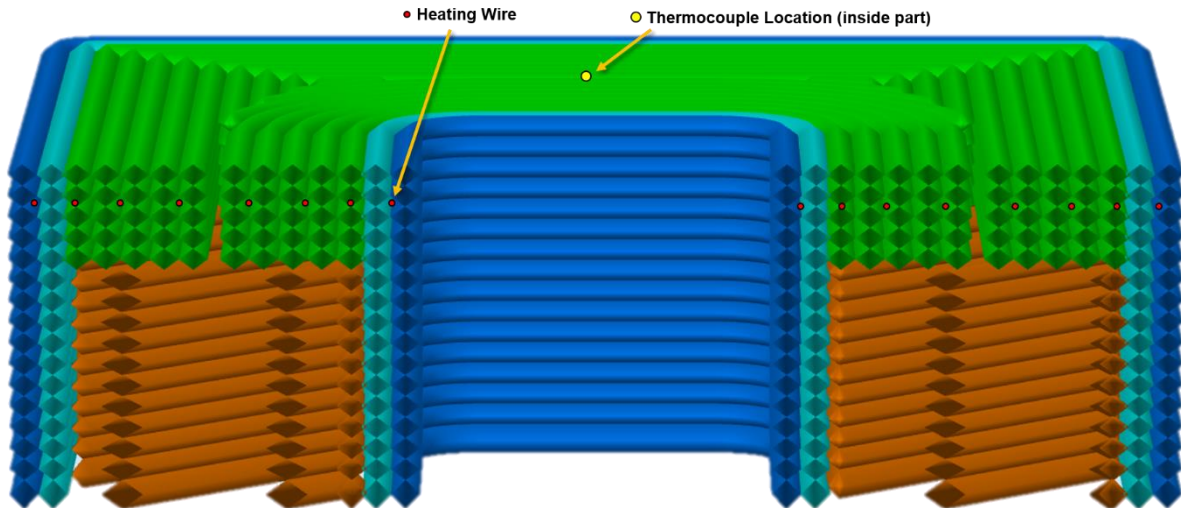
Section view of a printed tool equipped with a heating circuit and a thermocouple.
